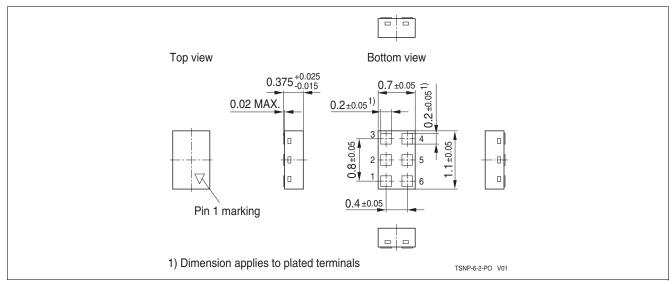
TSNP-6-2 Package Outline (top, side and bottom views)
